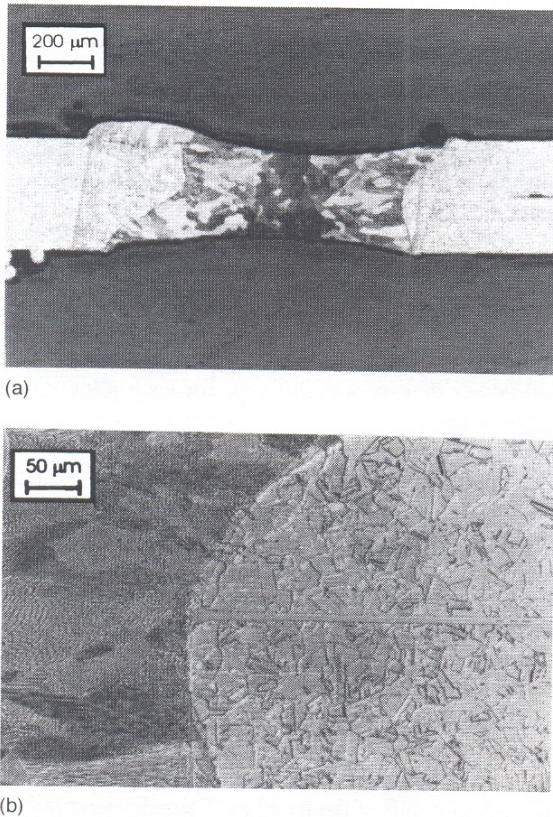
Transverse section of a weld in Au/Ni-plated Kovar sheets: (a) full weld and (b) brazing at the interface by the plating layers in the HAZ region at the interface.
